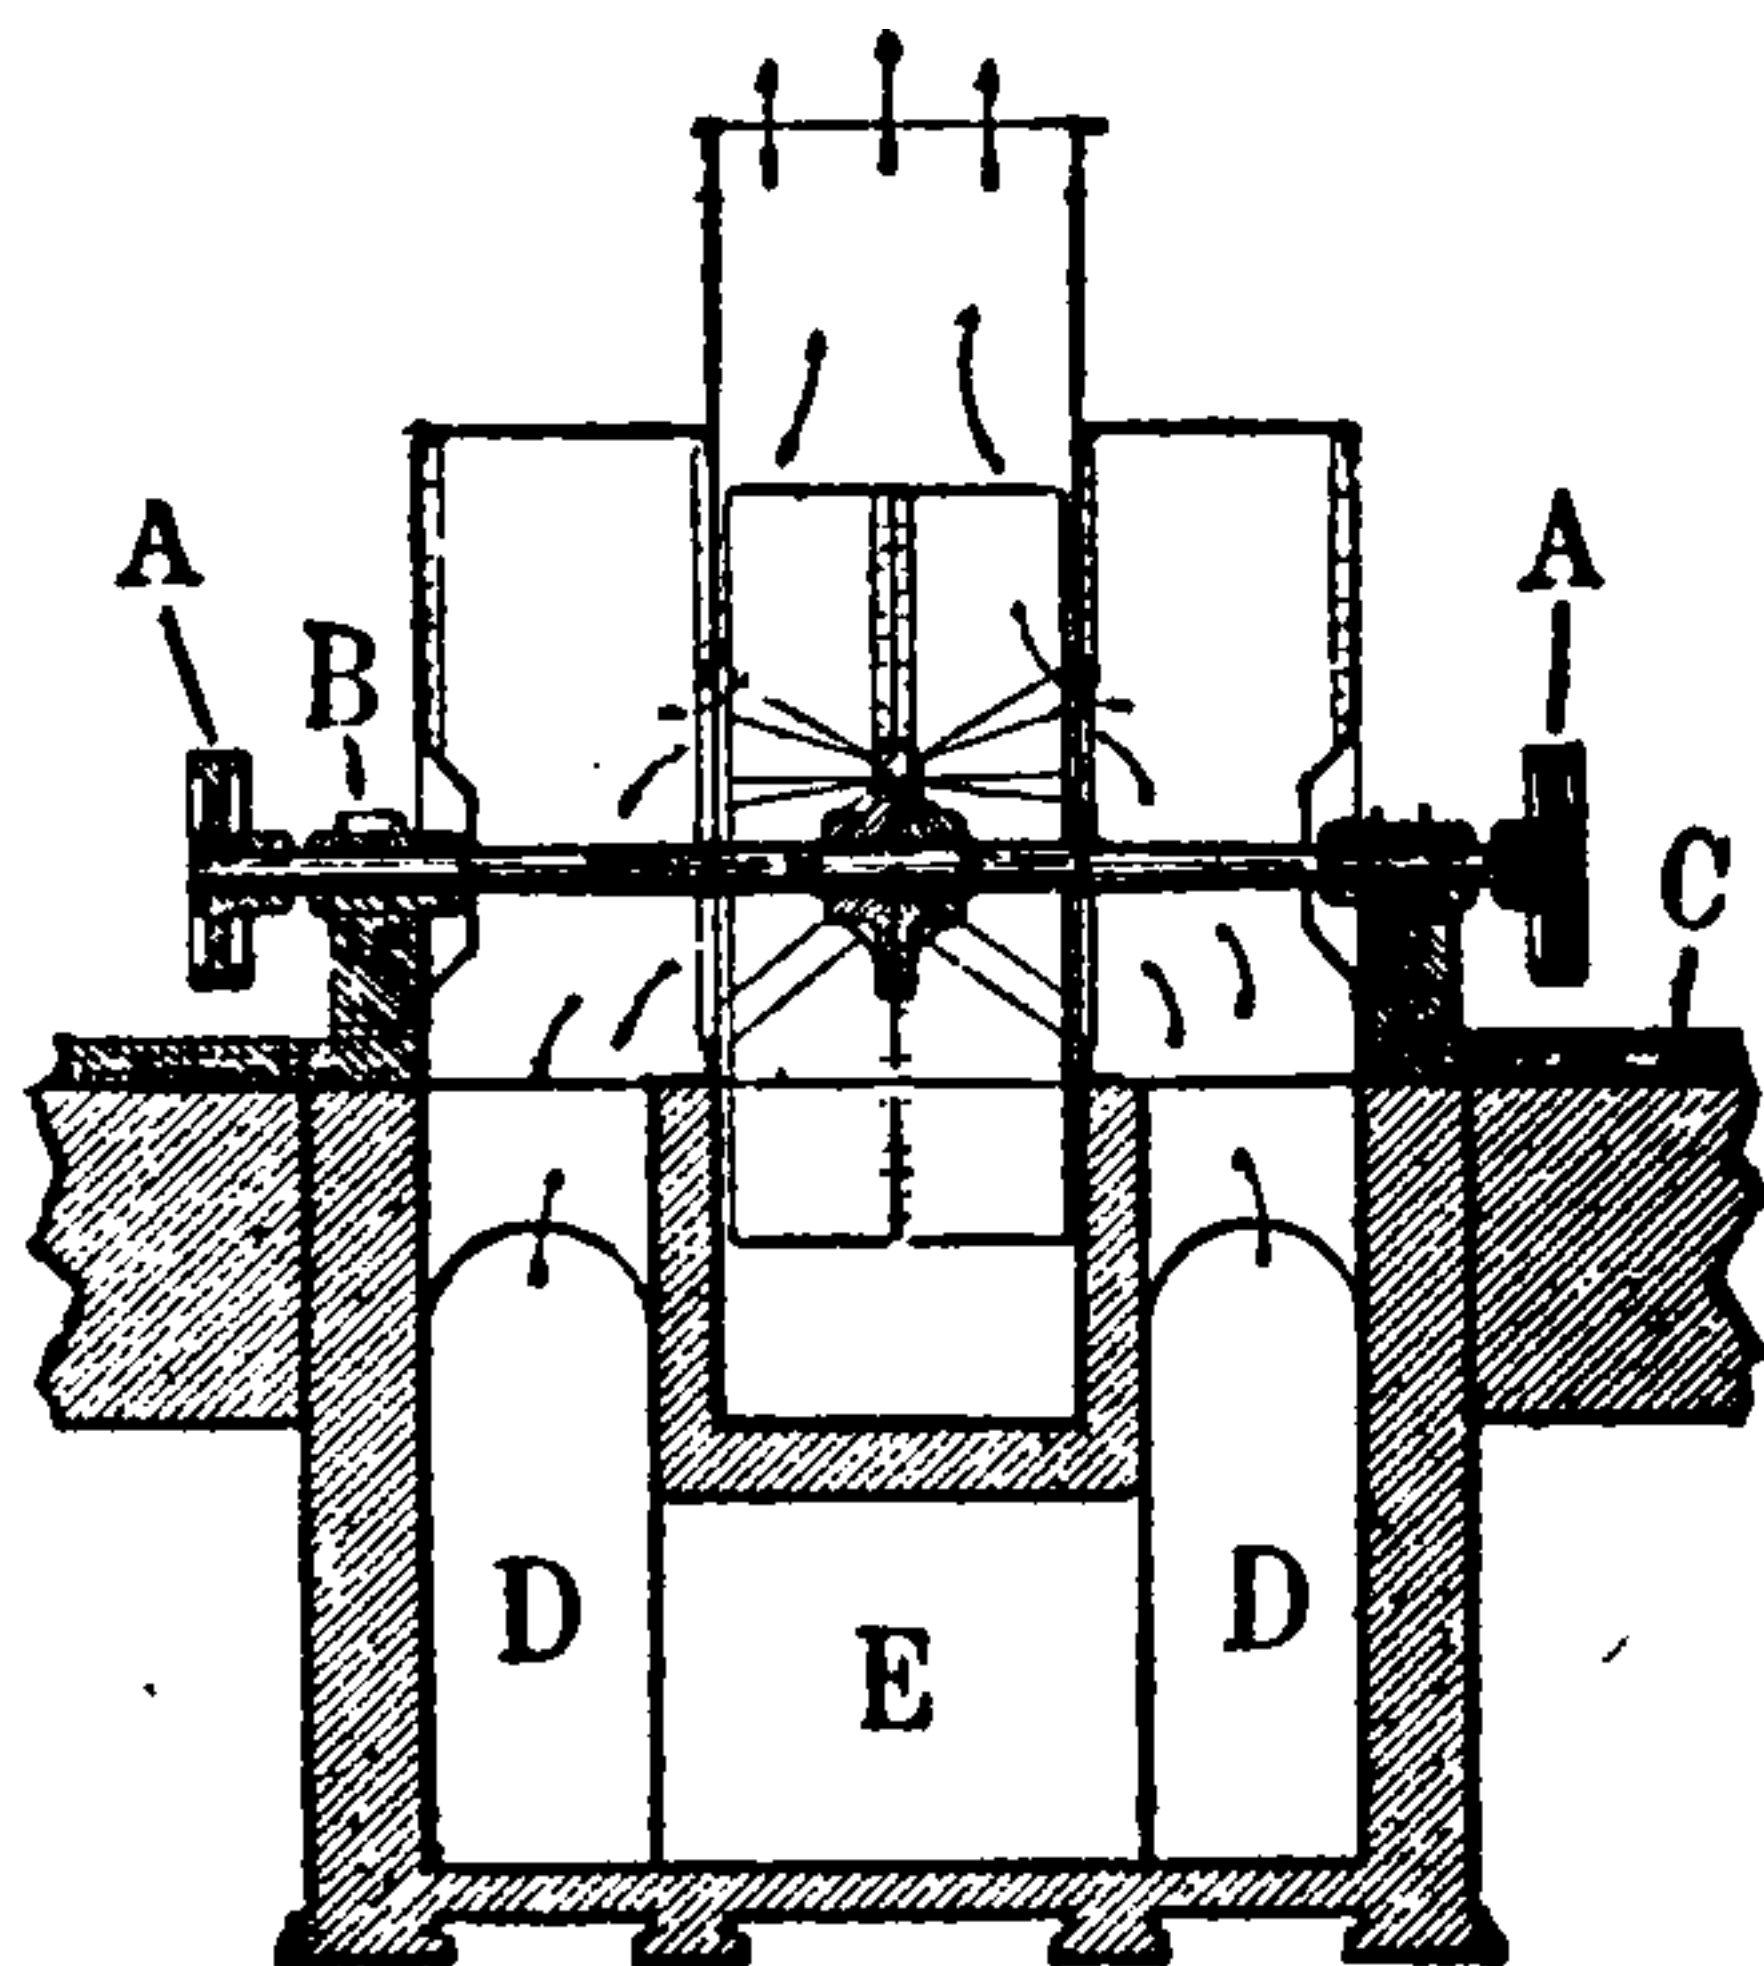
BUMSTEAD AND CHANDLER FAN: END SECTIONAL VIEW.
